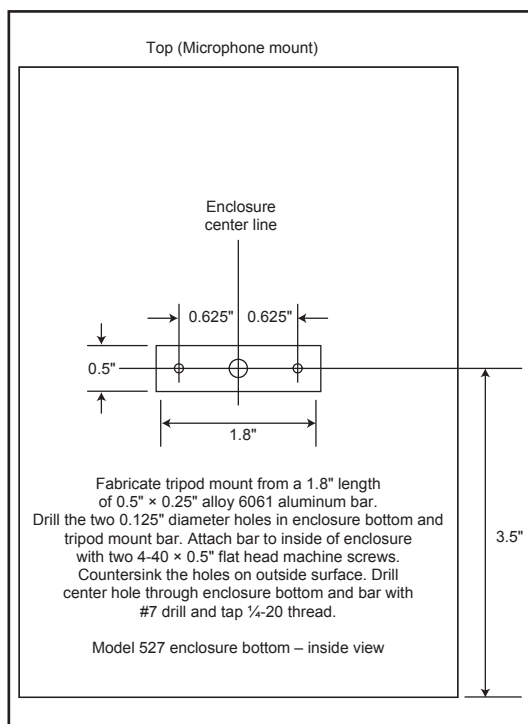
The tripod mount detail is located on the inside of the enclosure's bottom. It is better to use an unpopulated circuit board as a template to locate its mounting holes in the enclosure's lower half.
